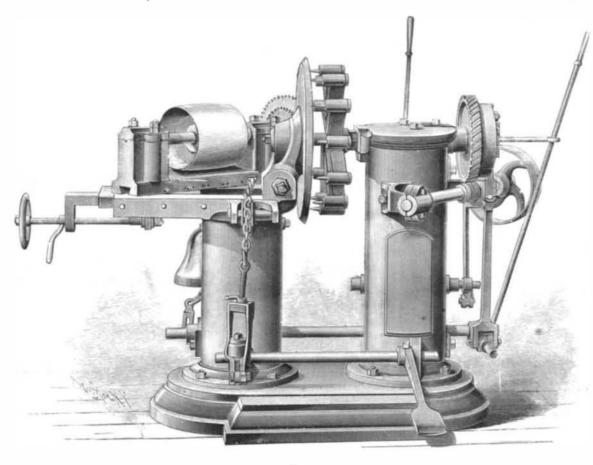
MACHINE FOR ROUNDING HEADS,
